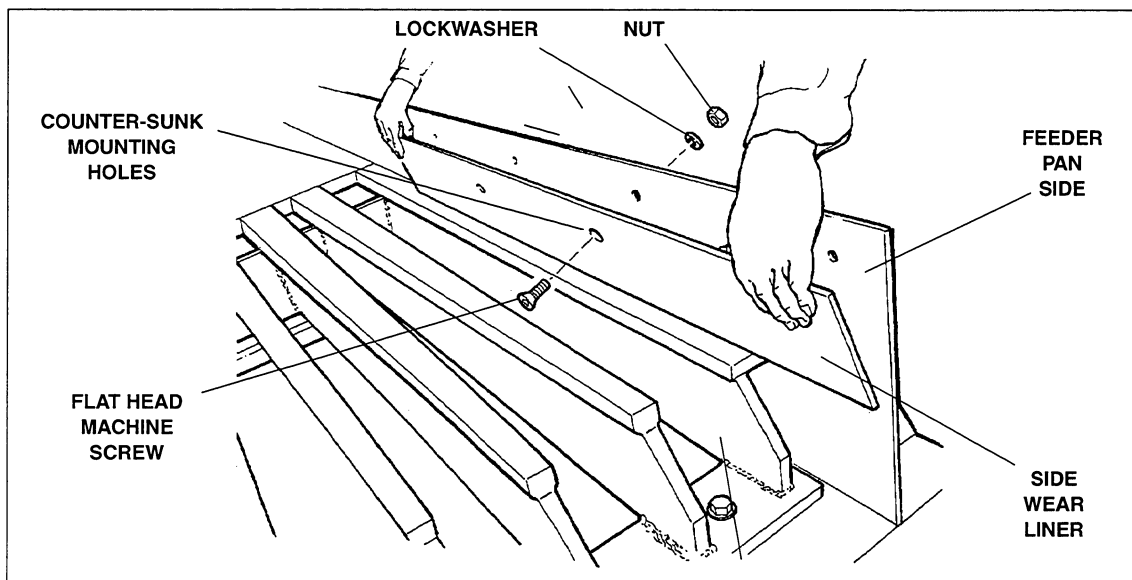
Side Wear Liner and Grizzly Assemblies
